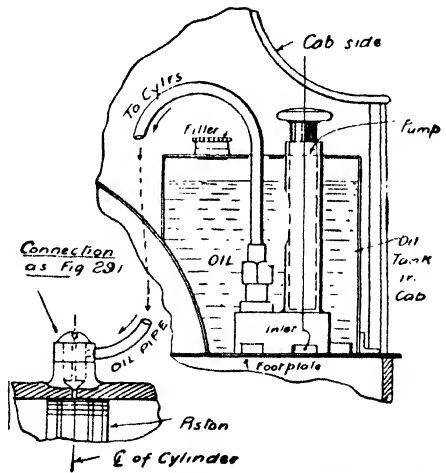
Simple Hand-operated Force-feed Lubricating Gear.
